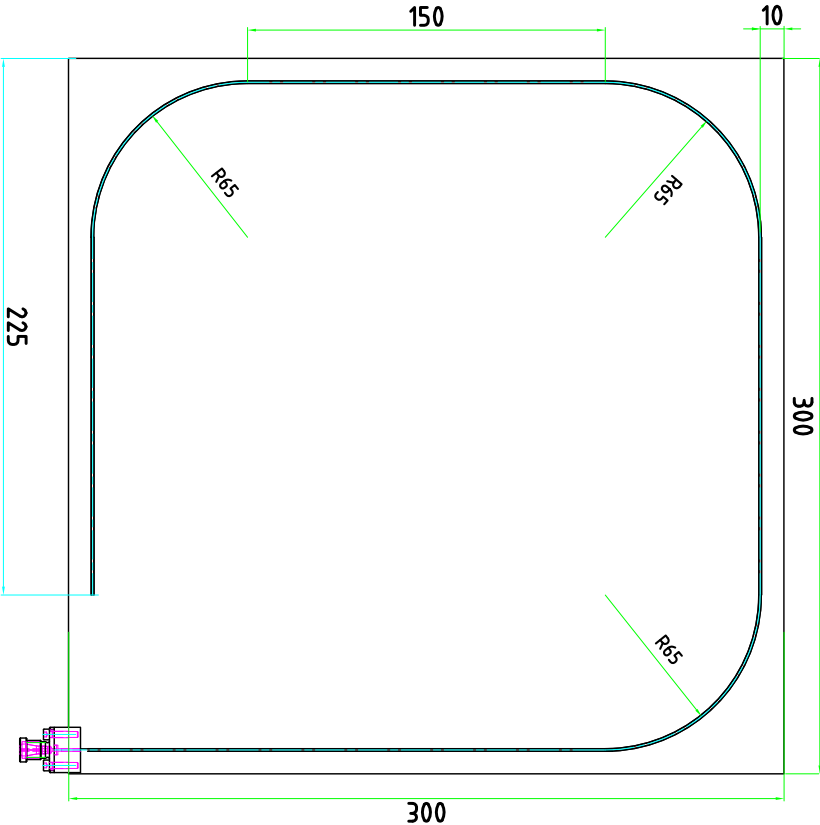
Technical drawing of an AMD tile with the fiber coupling installed. All dimensions given in mm.
